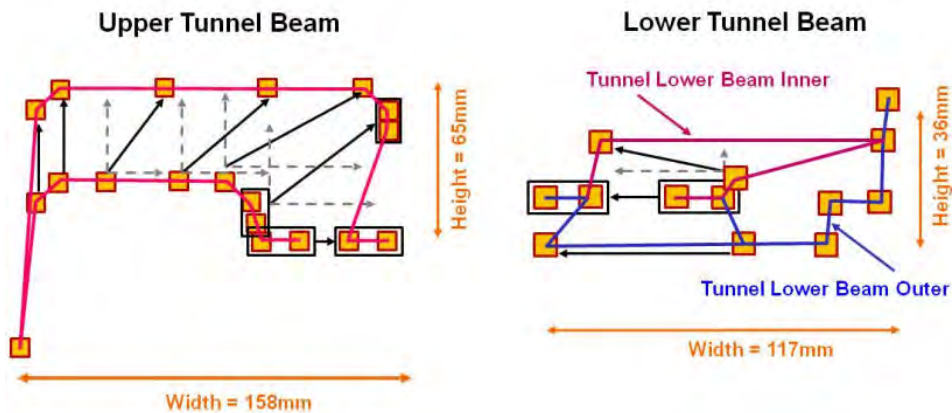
Stamped tunnel tail concept - cross-sectional parameterization
